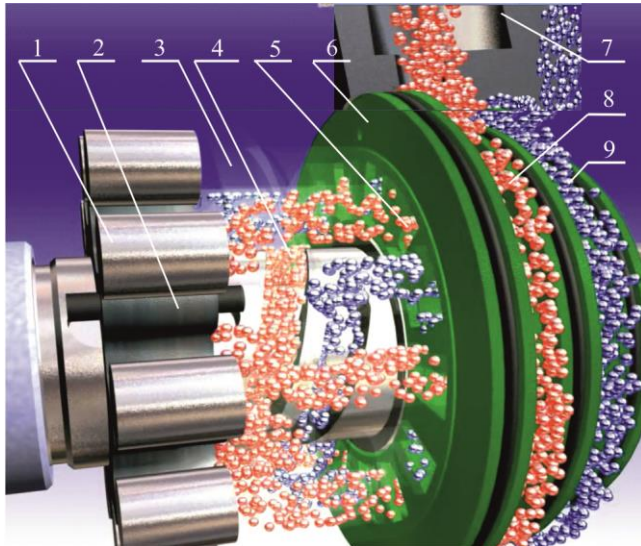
The distribution system of power fluid in a planetary motor: 1 is a distributor; 2 is a shaft; 3 is a sleeve valve; 4 is a front cover.
